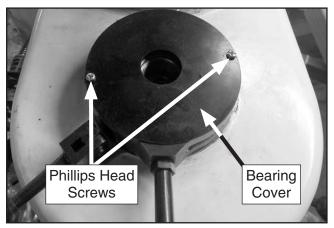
Location of G0796 bearing cover and Phillips head screws removed during belt/brake shoe replacement procedure.
